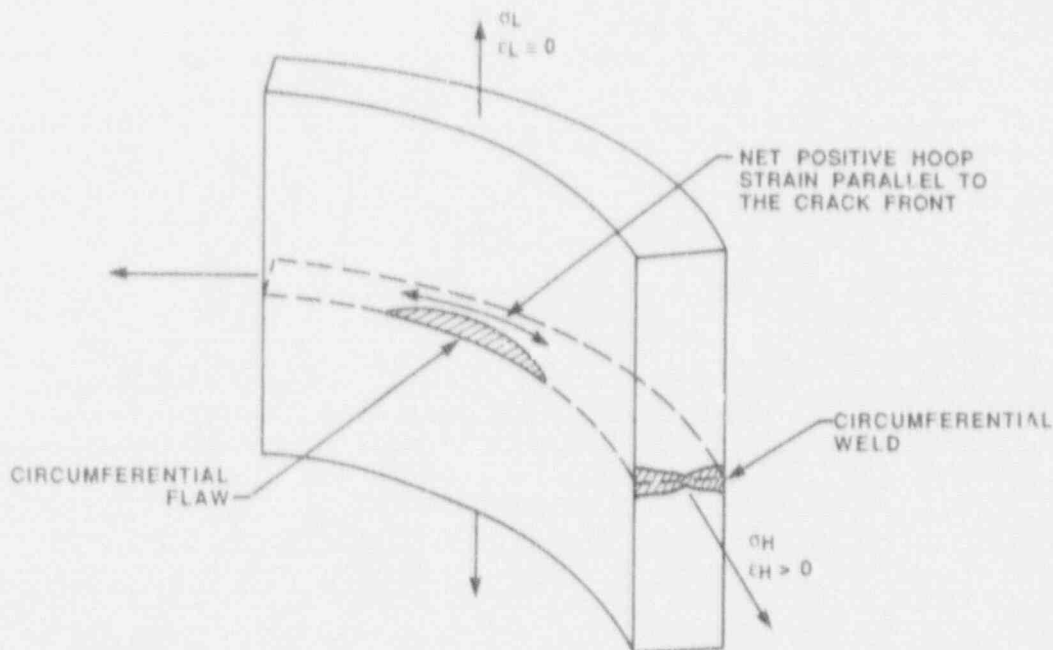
Configuration of circumferential flaw in weld of ring-forged reactor vessel showing positive tensile hoop strains parallel to crack front
